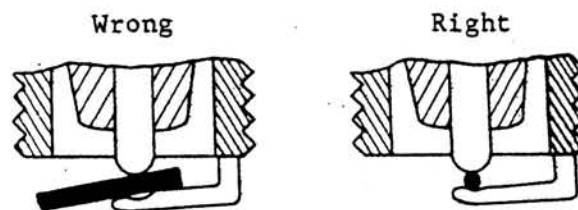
A round wire gage not a flat gage should be used to check used sparkplugs
